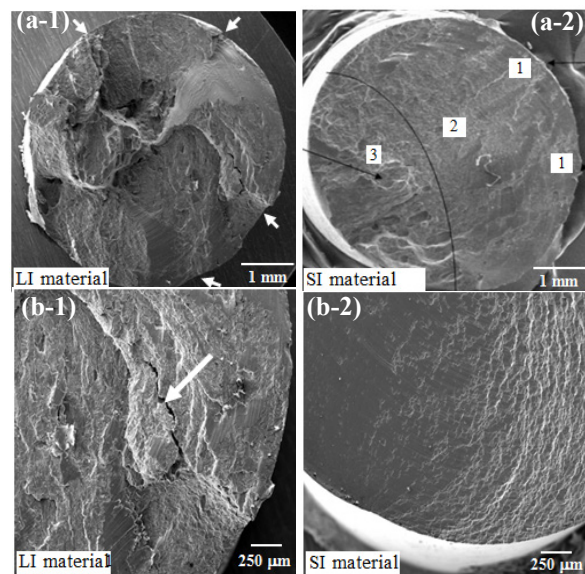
SEM images of fatigue fracture surfaces for the (a) overall fracture surface and (b) higher magnification of LI and SI materials.
